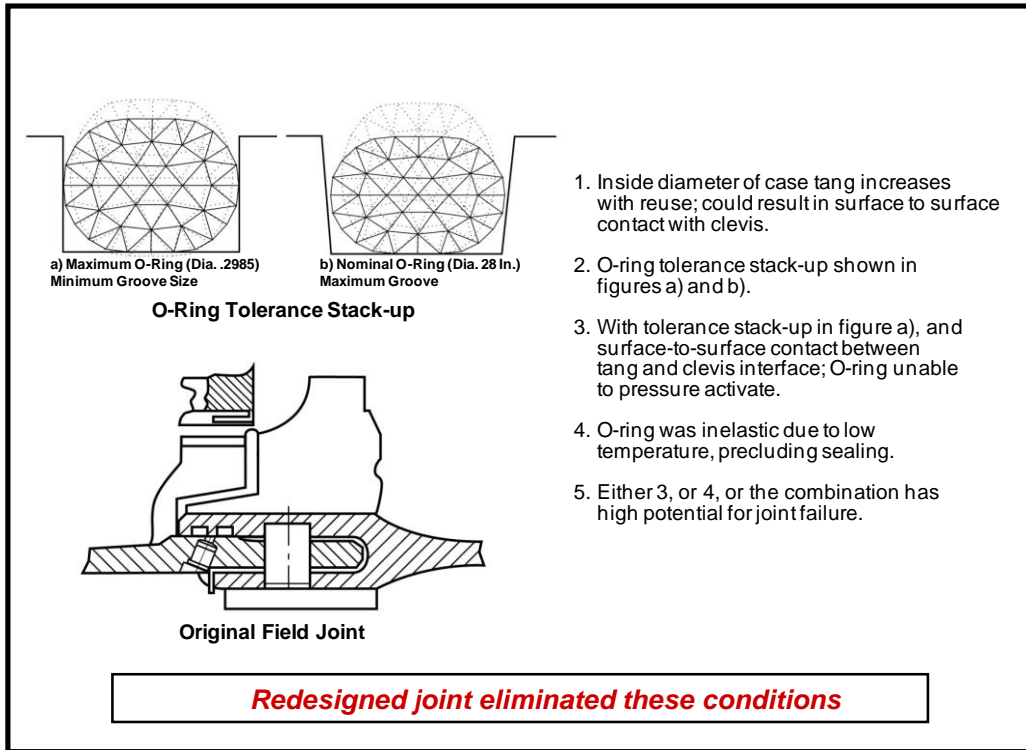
STS 51-L Field Joint – O-Ring / Groove Tolerance Effects
